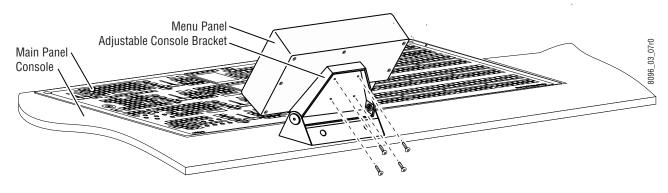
Menu Panel Mounting With Adjustable Console Bracket
